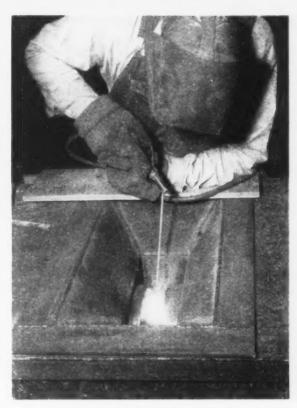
Welding is done through an opening in the protection plate. It protects the welder from radiant and convected heat and prevents chilling of the cylinder which is kept at 500 to 600°F.
